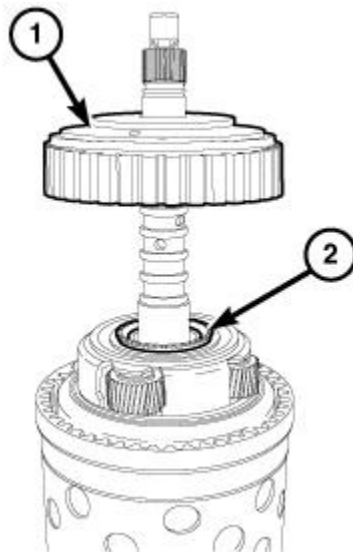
P1 Annulus/B-Clutch Hub Assembly, Needle Bearing And Holding Plate
